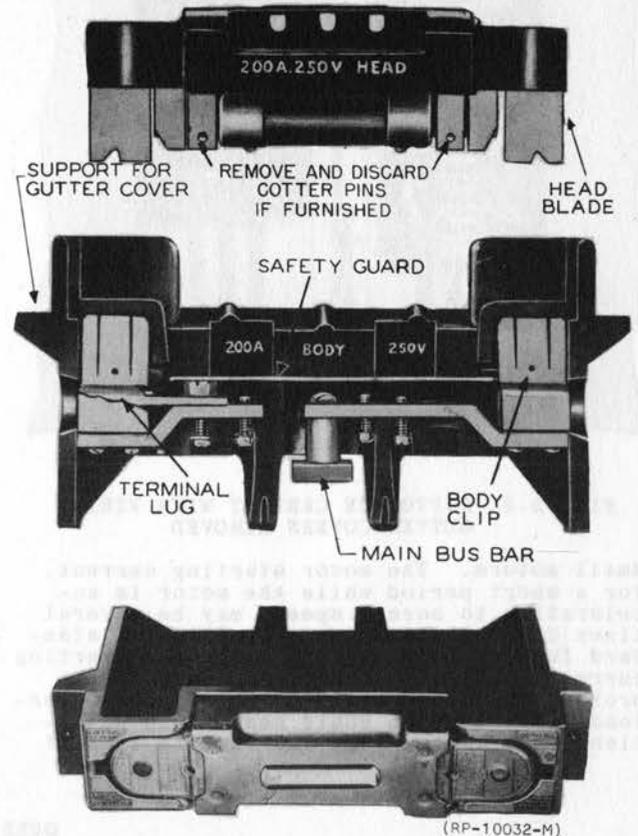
SECTIONAL AND EXTERIOR VIEW OF SAFETY TYPE FUSE UNIT (SAFTOFUSE)
